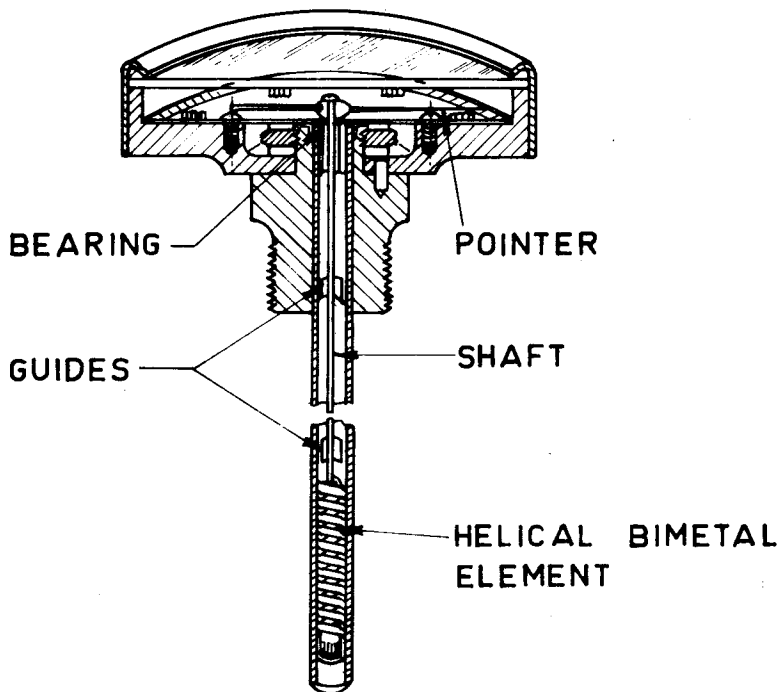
Sectional view of industrial thermometer using helical-type bimetal element
